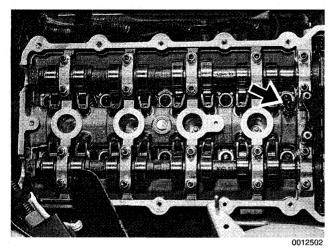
Location of camshaft oil sprayer tube seal in M44 cylinder head (arrow).
